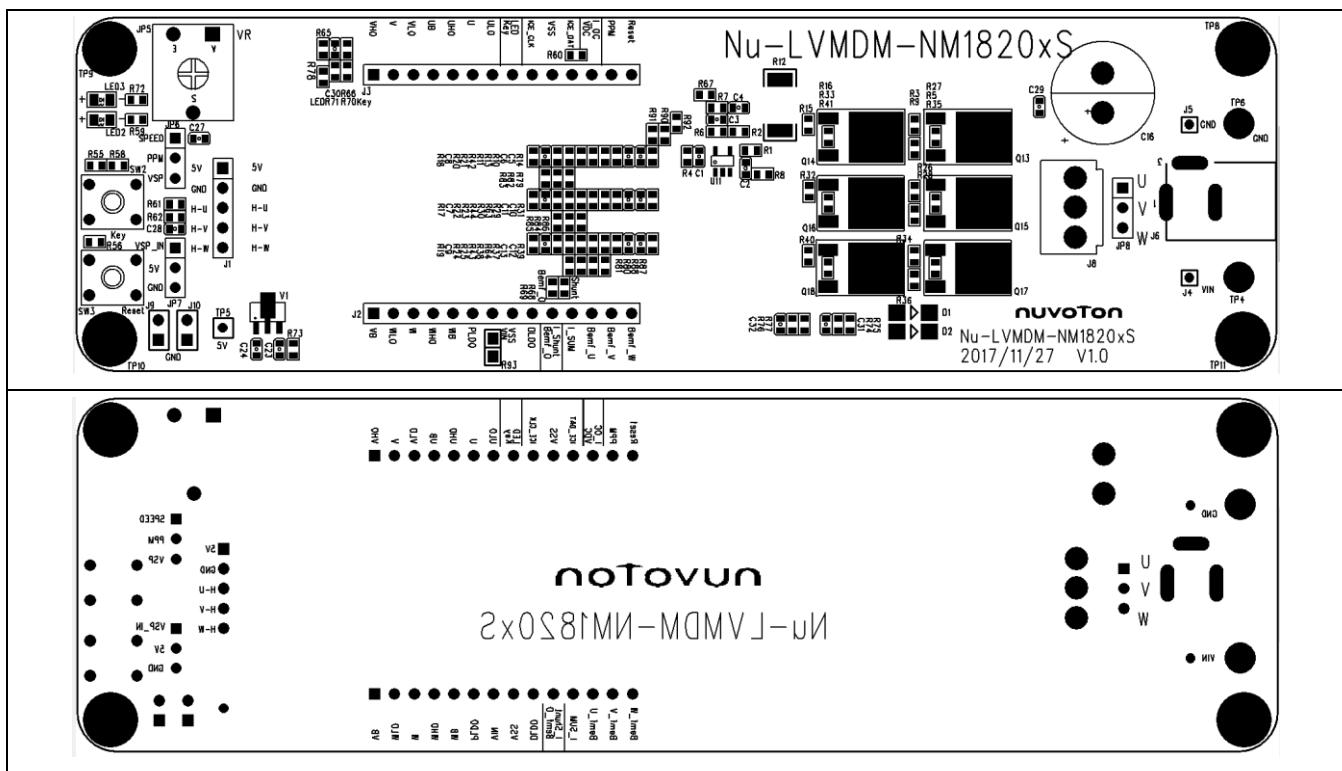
NuTiny-SDK-NM1820xS PCB Placement
